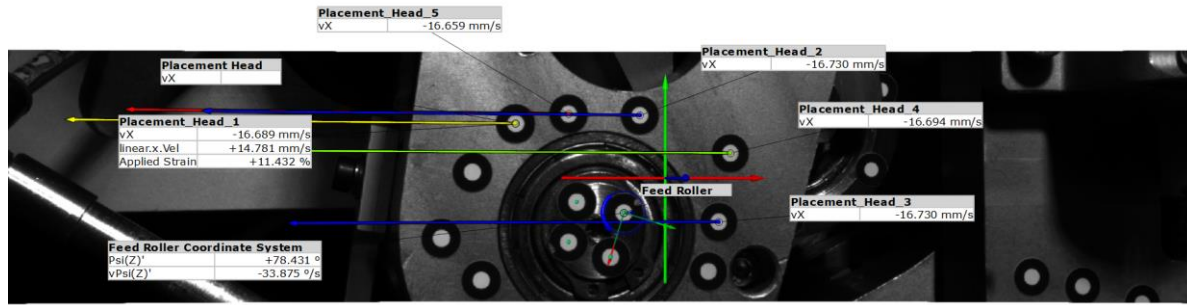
Re-feed roller and parts of the placement head with reference markers.
